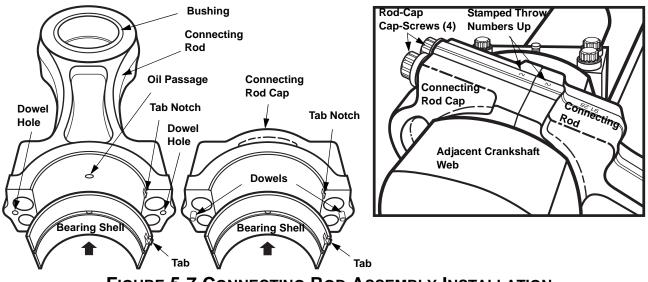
CONNECTING ROD ASSEMBLY INSTALLATION
